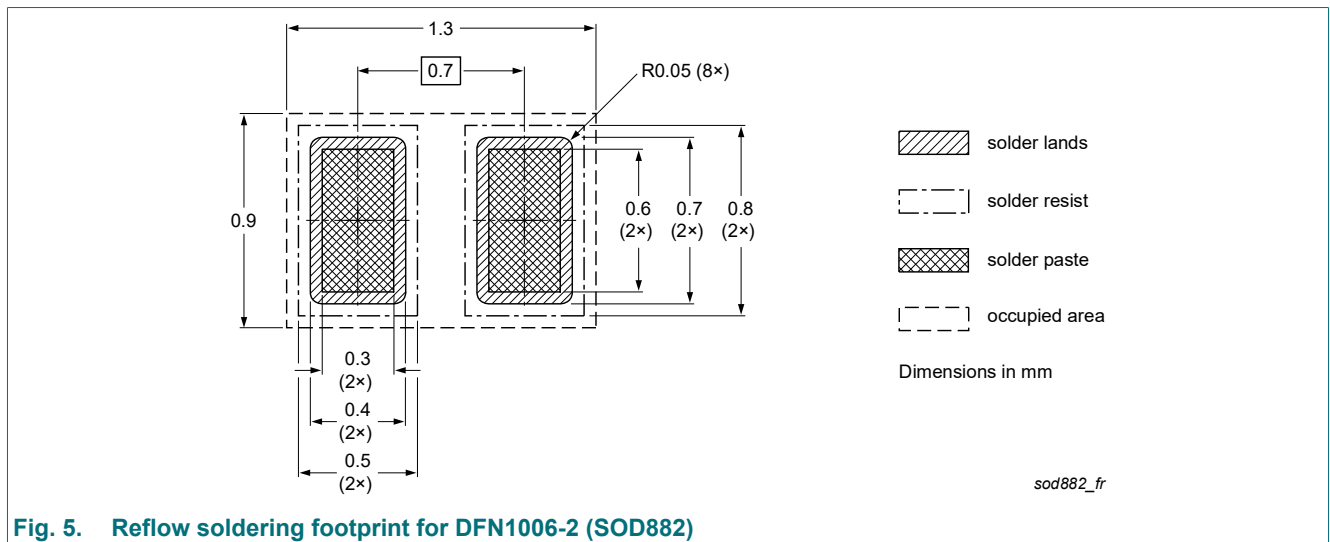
Reflow soldering footprint for DFN1006-2 (SOD882)
